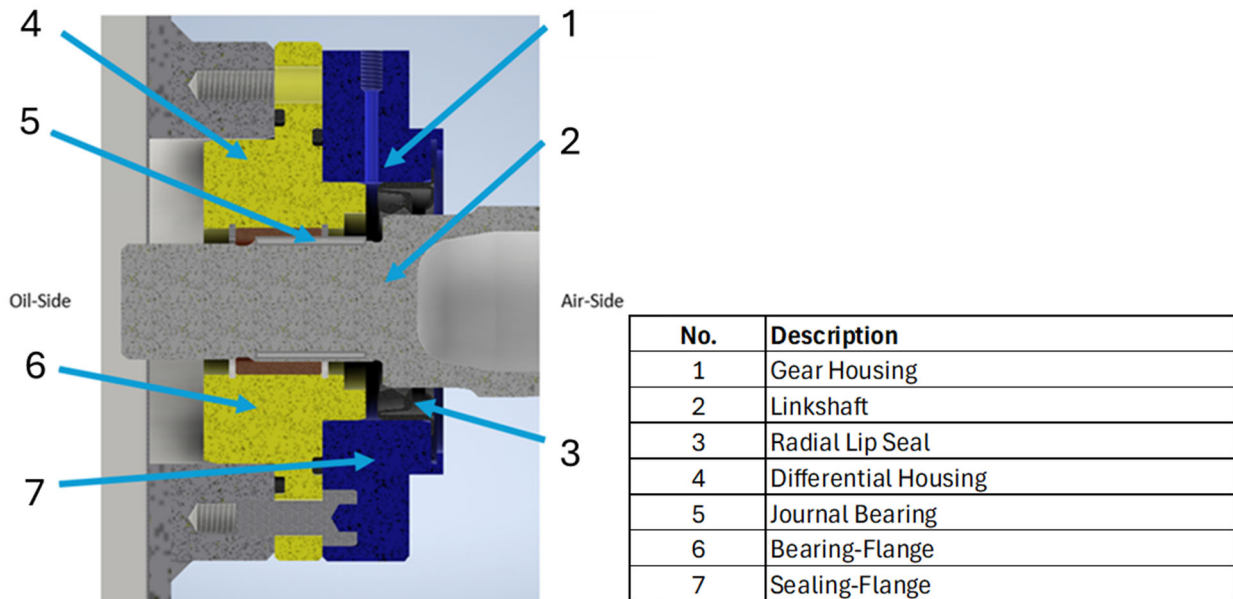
Sealing system of the dynamic drivetrain sealing test-rig.
